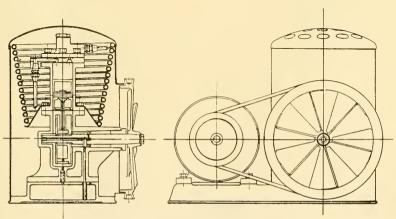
KOLD KING REFRIGERATING MACHINE.
